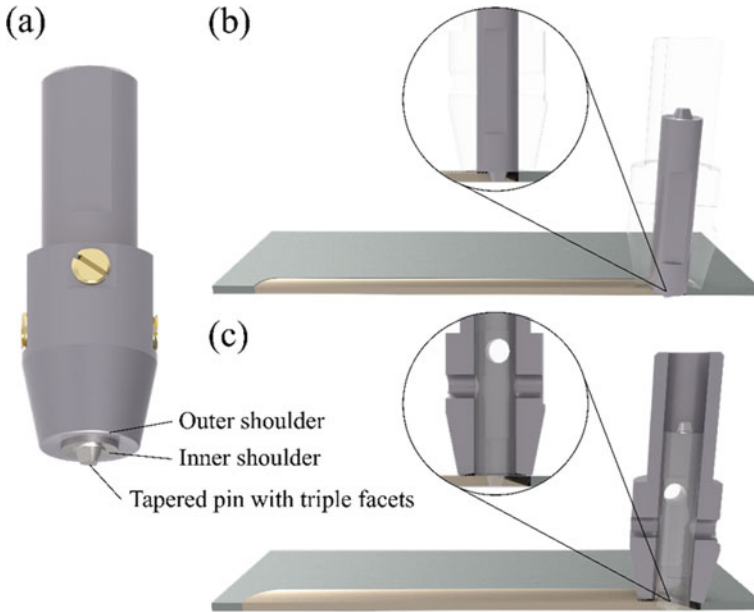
a Profile of the tool; schematics of the “single welding, double forming” concept: b the first forming and c the second forming
